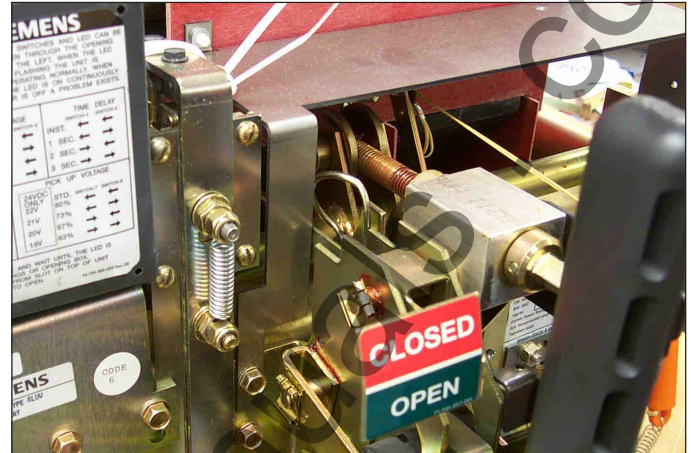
Trip Unit Mounting Bracket Assembly on the Breaker (LAF-1600 C).
